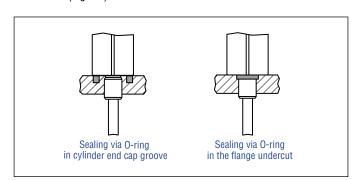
Possibilities of sealing for threaded flange with flat-face
